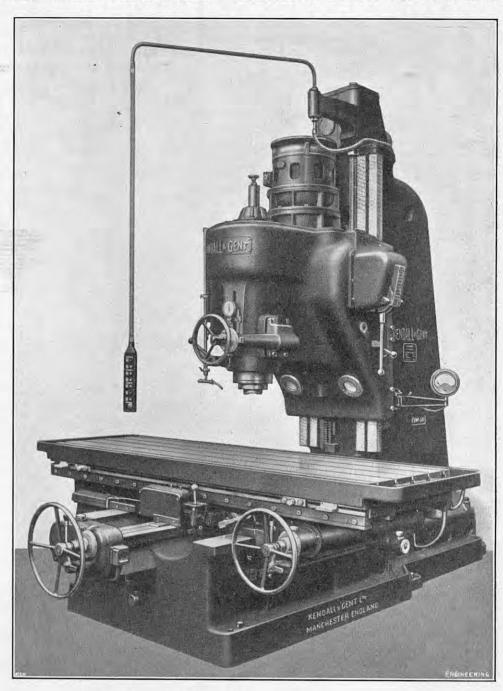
VERTICAL MILLING MACHINE; KENDALL AND GENT, LTD.
